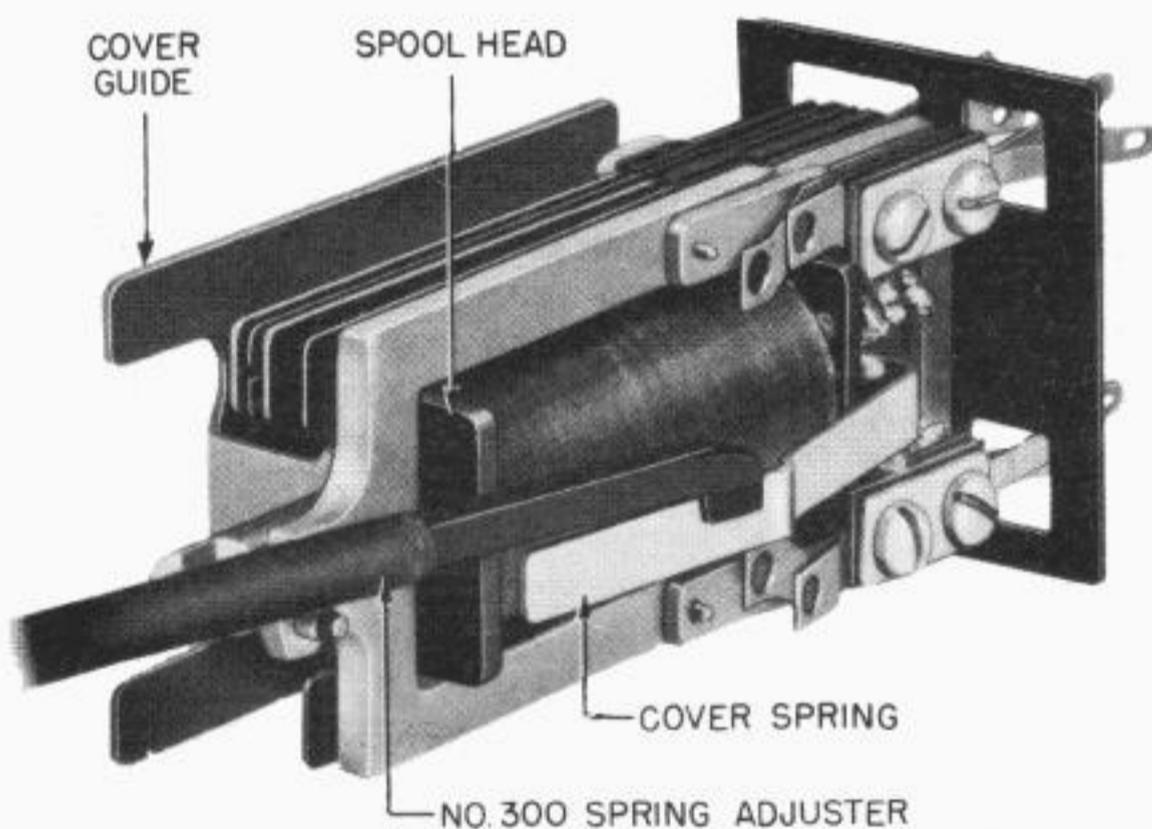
METHOD OF ADJUSTING COVER SPRING PRESSURE
